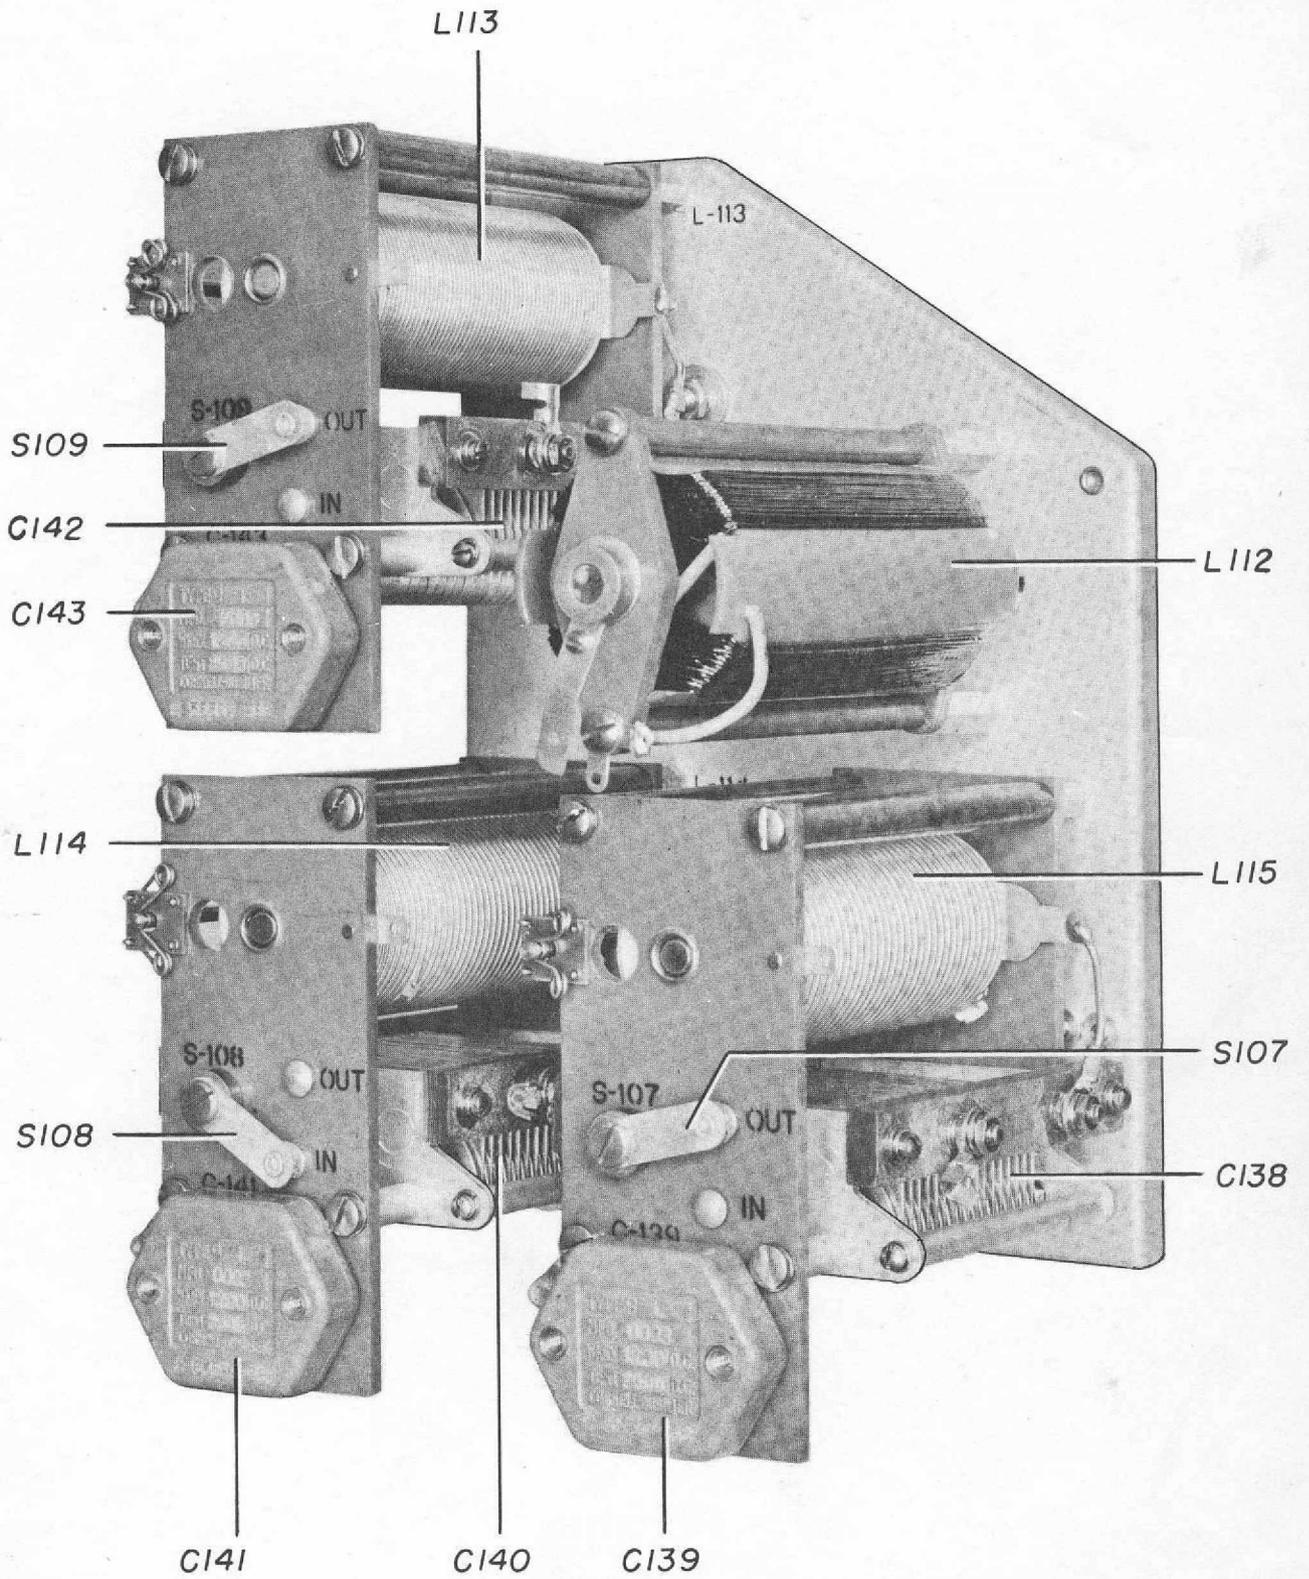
REAR VIEW COIL & CAPACITOR ASSEMBLY
